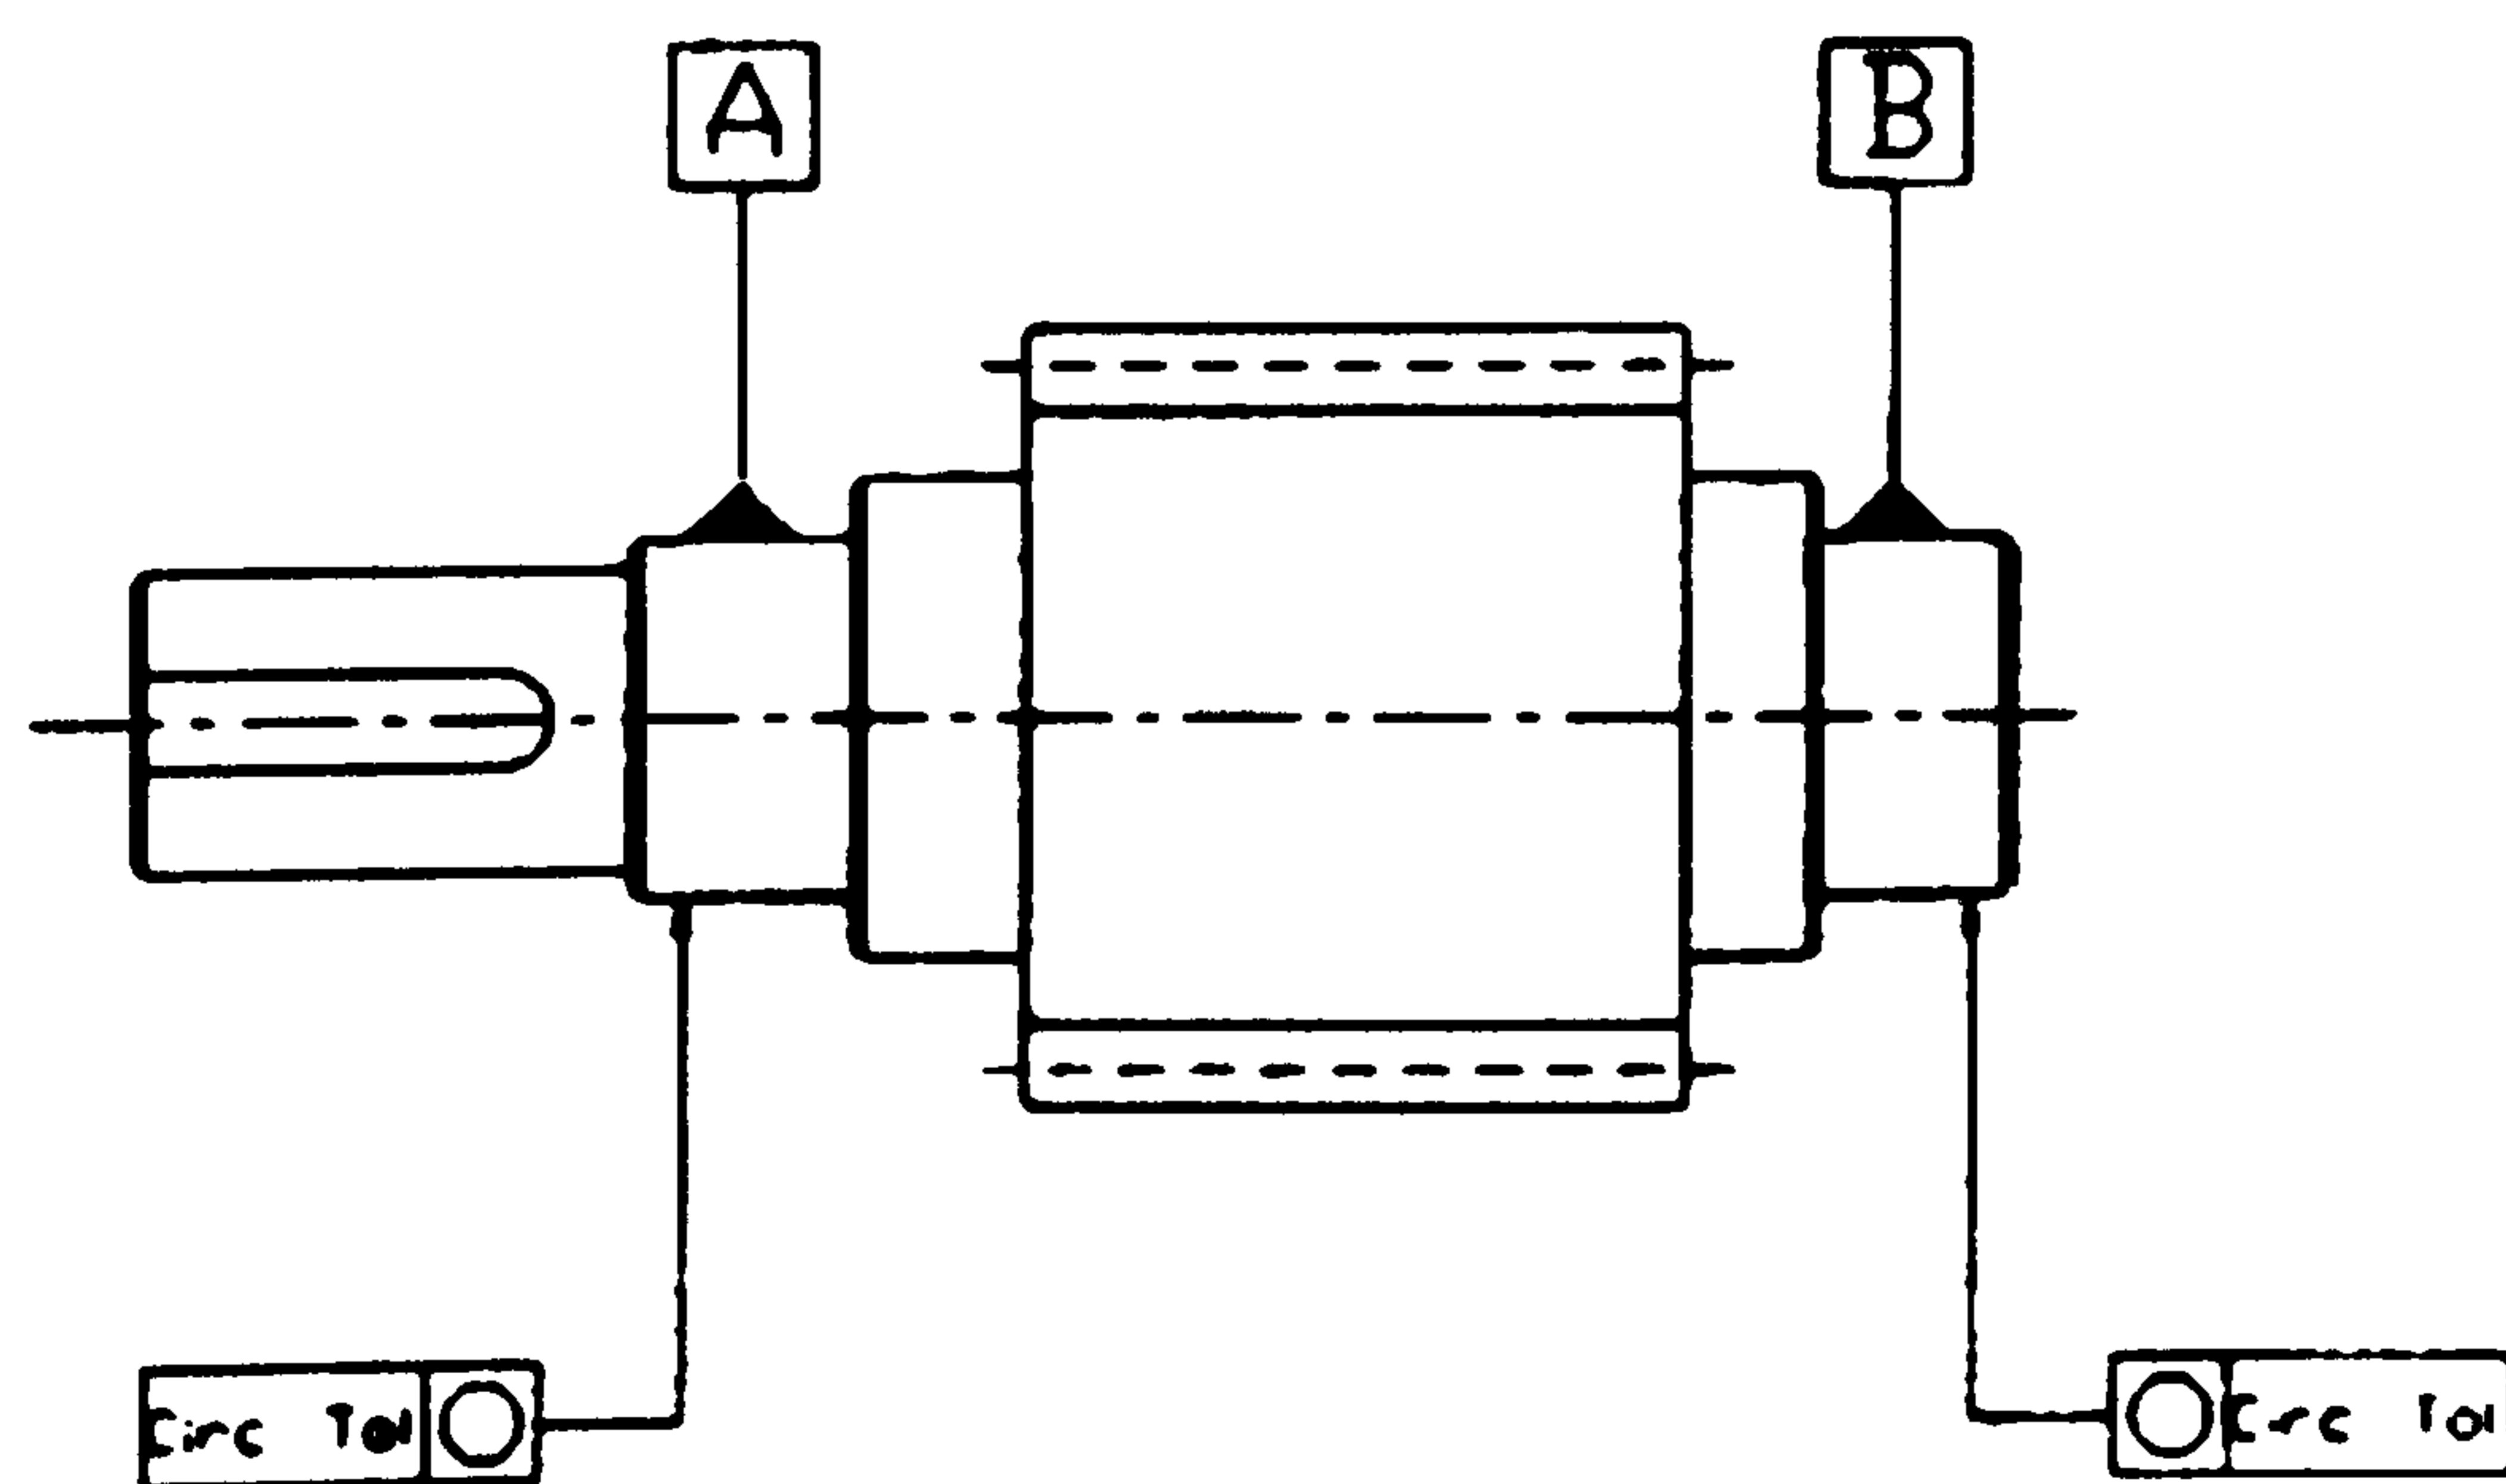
Datum surfaces and errors in mounting the gear on a rotary table.
